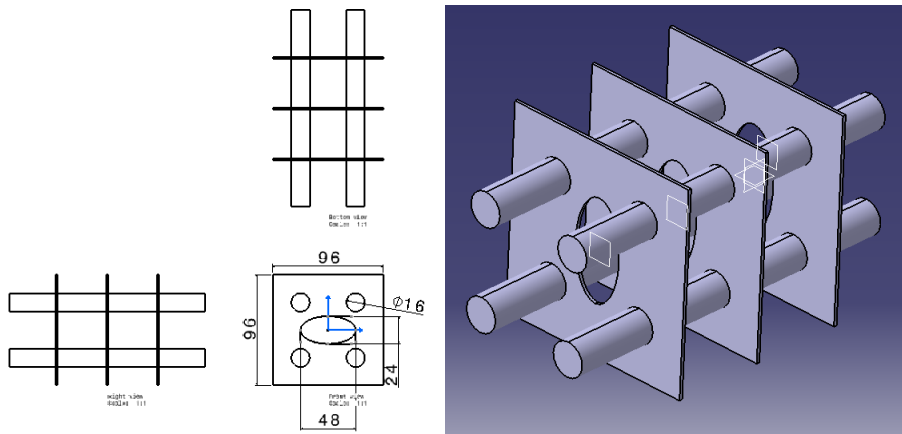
3D Model Tube and Finned Type Heat Exchanger with Ellipse 1 Cutout
